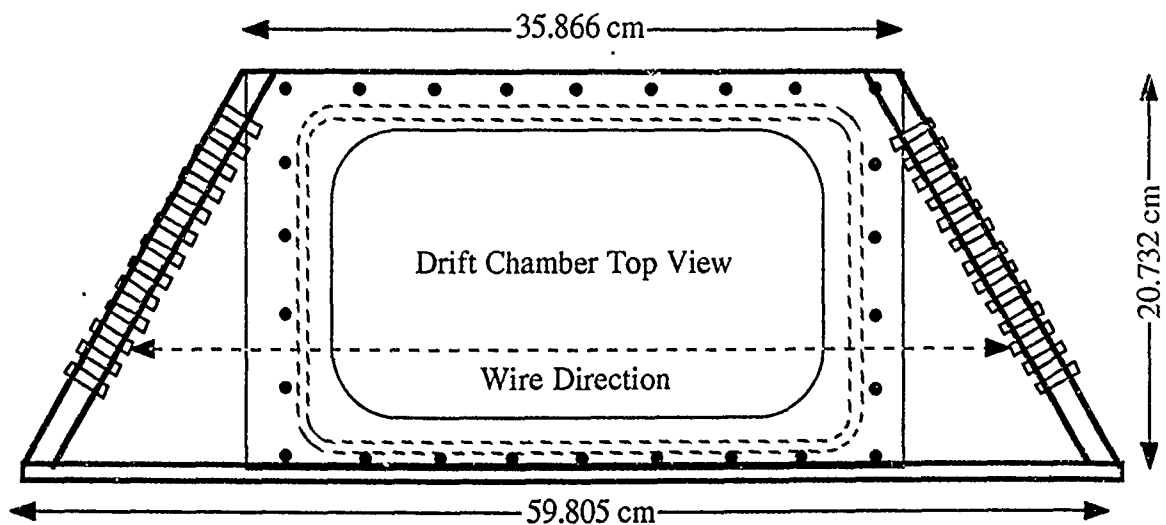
Dimensions of the Drift Chamber [Ref. 5].
